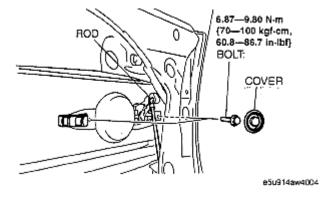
Identifying Outer Handle Bolts With Torque Specifications Courtesy of MAZDA MOTORS CORP.
